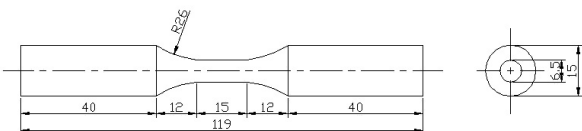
Tensile and low-cycle fatigue test specimens (unit: mm)
